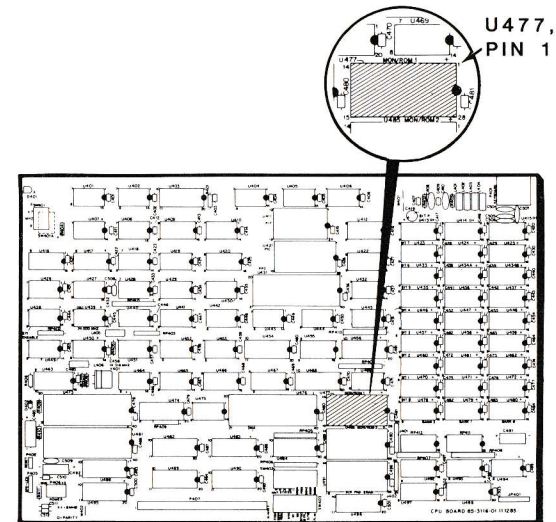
CPU Card (PCB Part No. 85-3116-XX)
